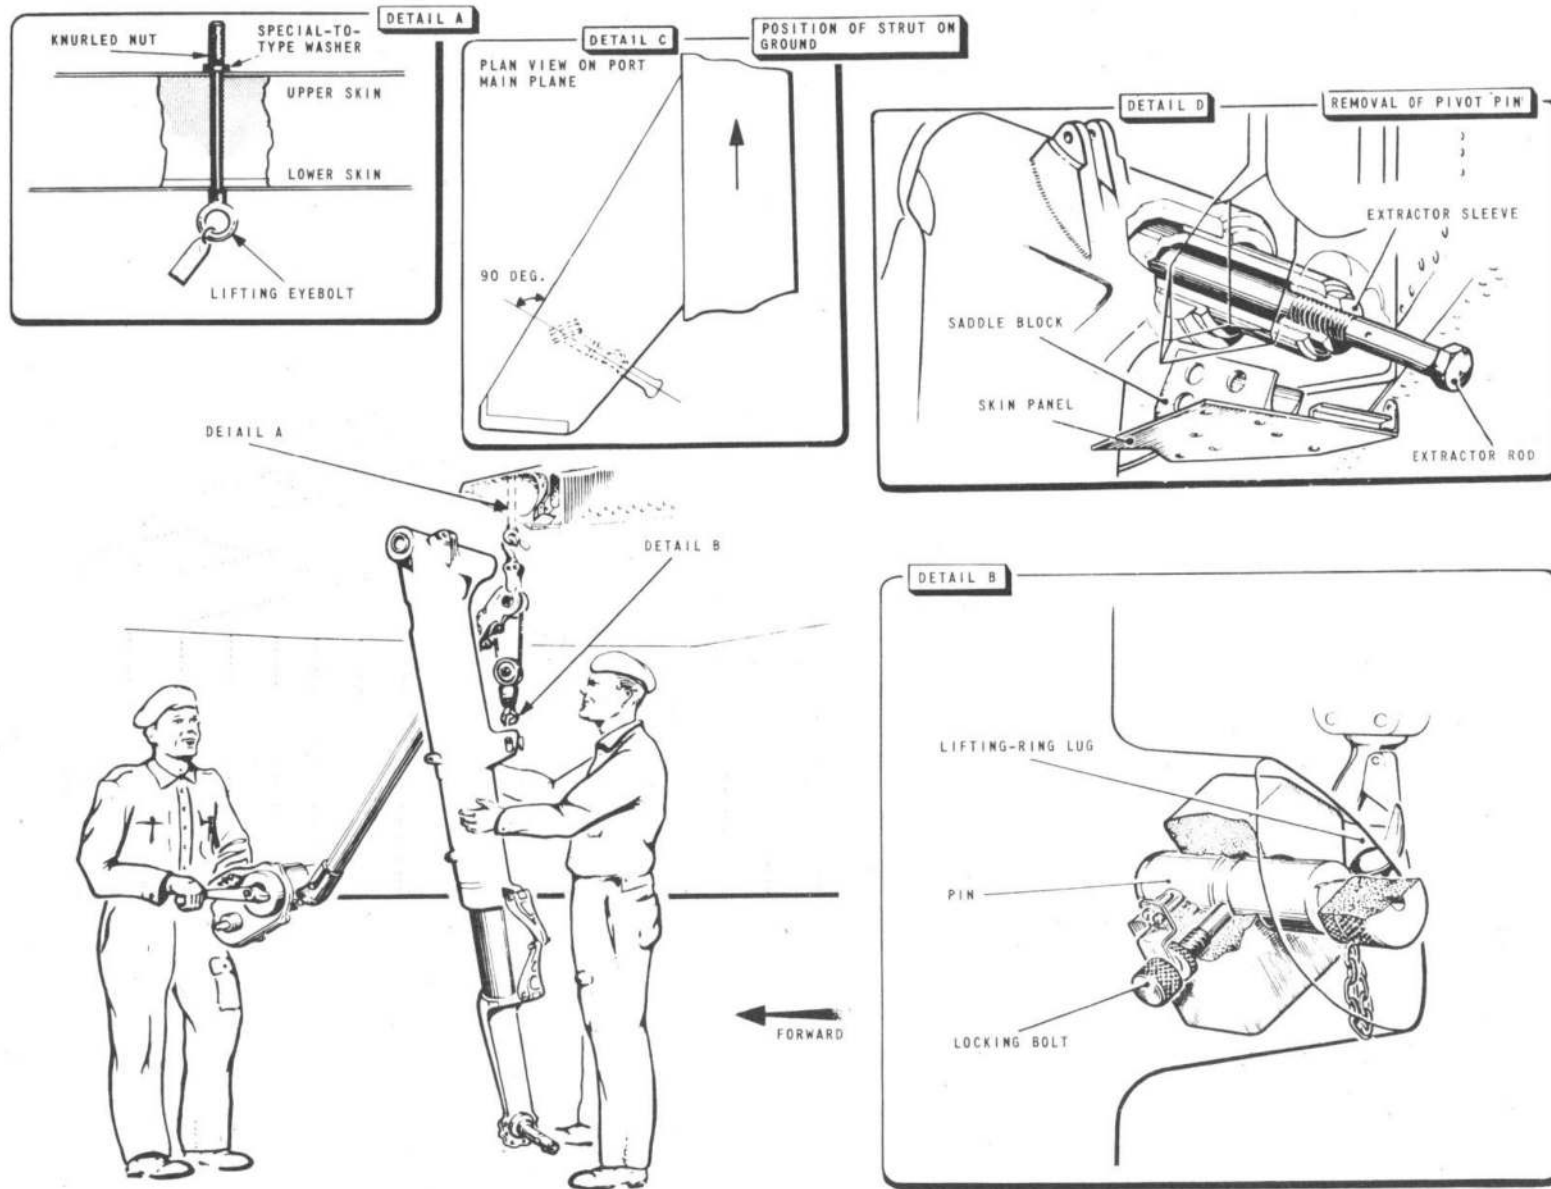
MAIN UNDERCARRIAGE STRUT - REMOVAL AND ASSEMBLY
